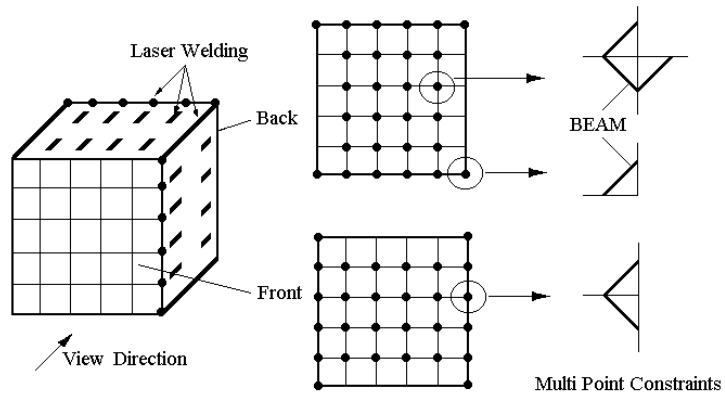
Schematic view of welding points of the OHT spacer grid
